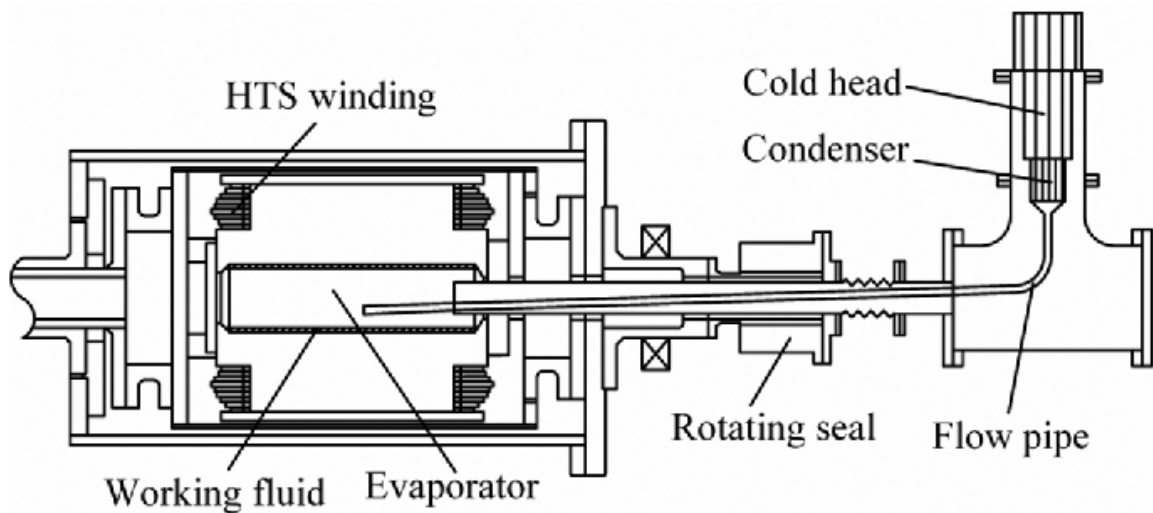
A thermosyphon-cooled rotating machine [39].
